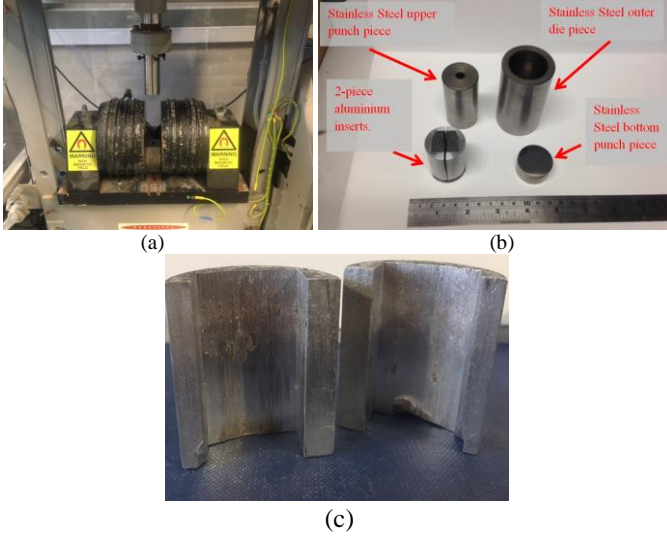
The uniaxial press set up with a transverse field electromagnet. (a) Pressing tool, including the punch piece and the electromagnet coil. (b) Die set and punching components. (c) Die set inner face damages due to pressing misalignment.
